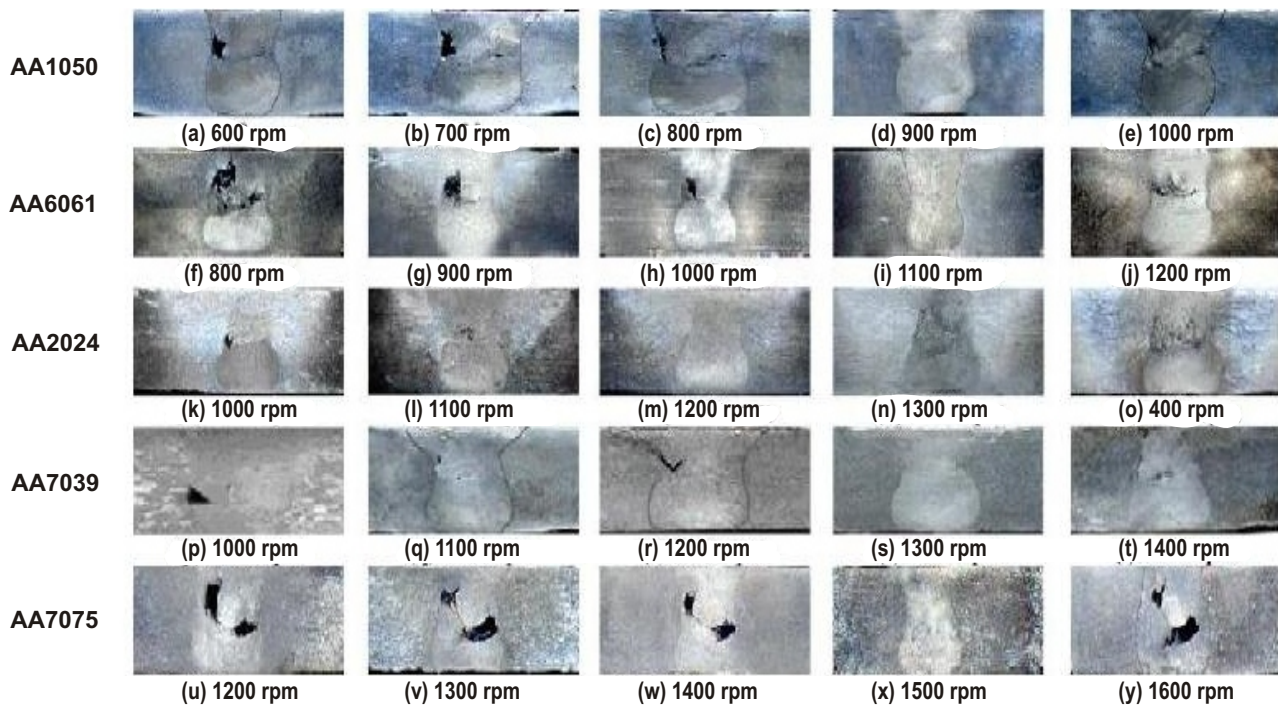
Effect of tool rotational speed on macrostructure of aluminium alloys (welding speed = 75 mm/min and axial force = 8 kN). V. Balasubramanian [39]
